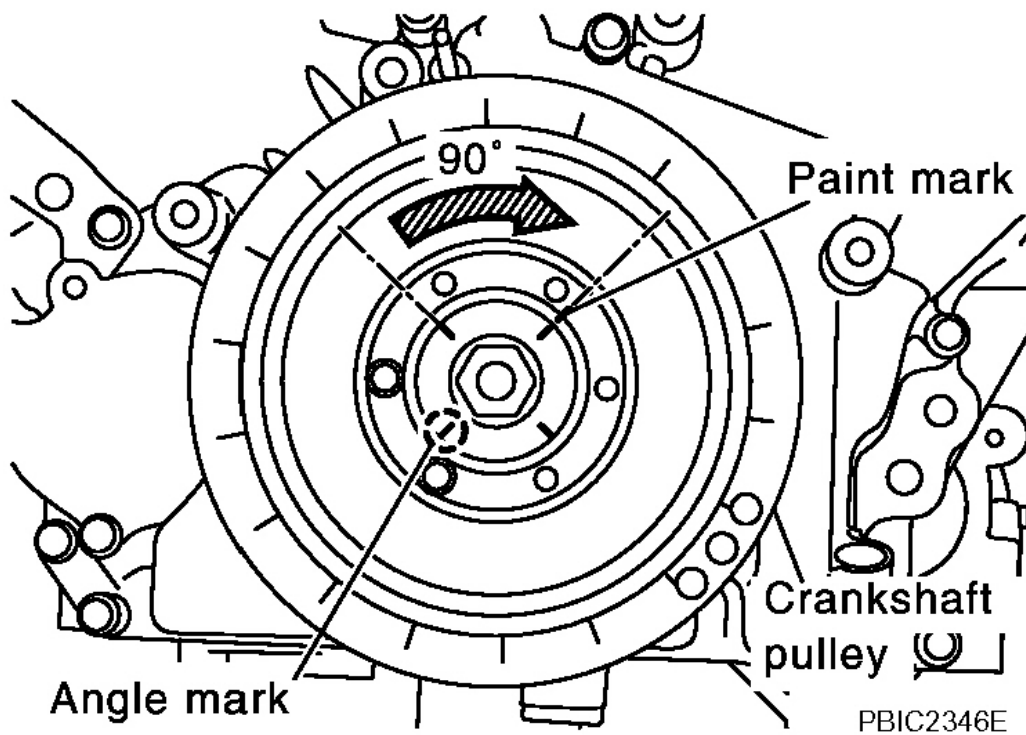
Rotating Crankshaft Pulley From Position Of No. 1 Cylinder Compression TDC
